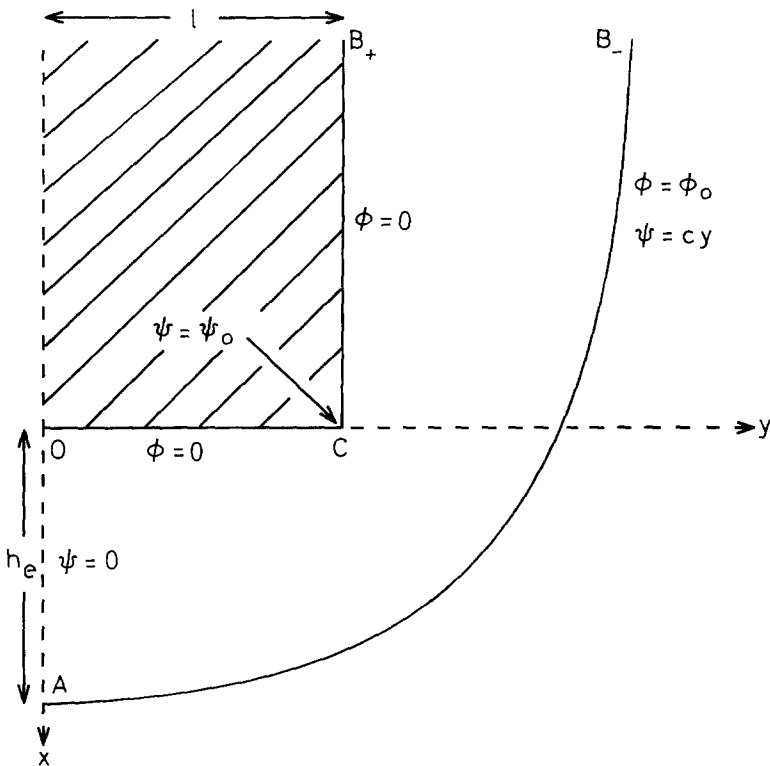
A sketch showing the configuration for a straight sided tool without insulation.
